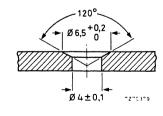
Shape of hole for 500 V insulation, nut fastening.
